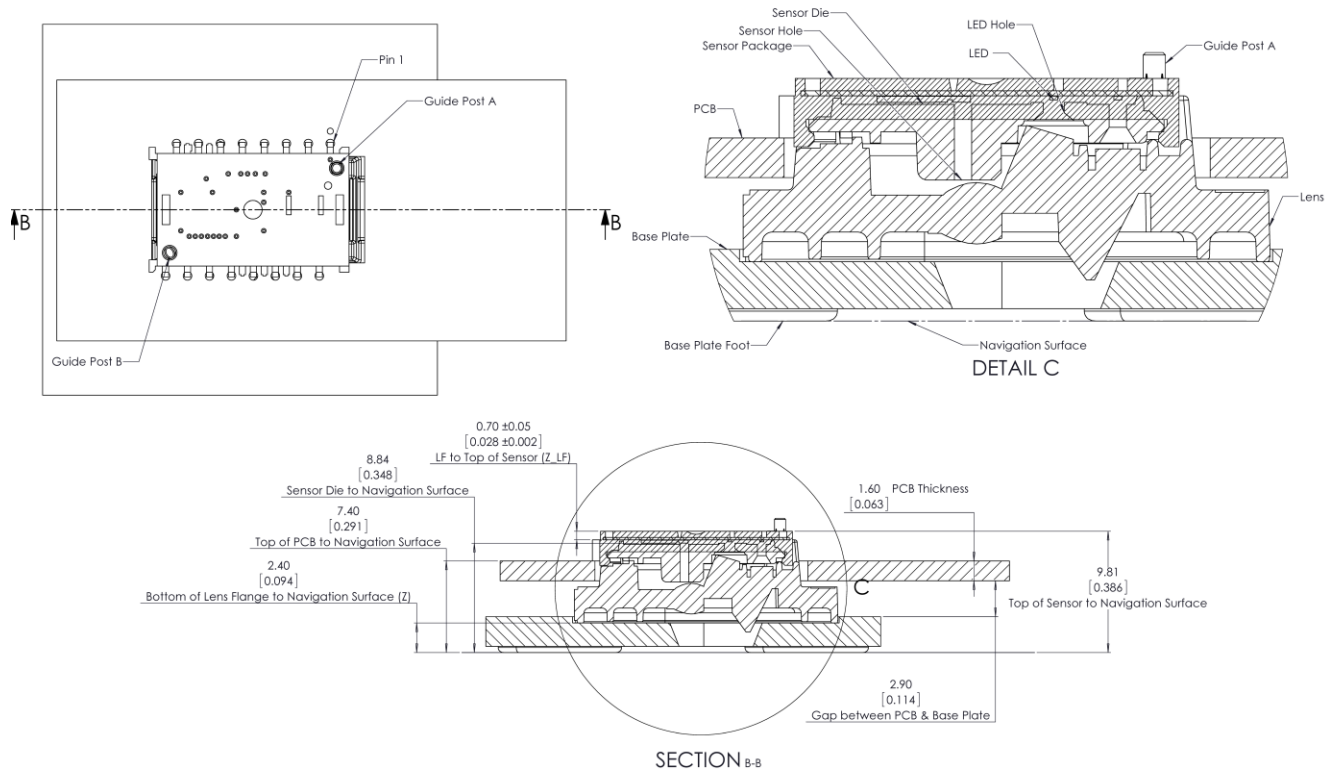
Assembly drawing of PMW3360DM-T2QU and distance from lens reference plane to tracking surface (Z)
